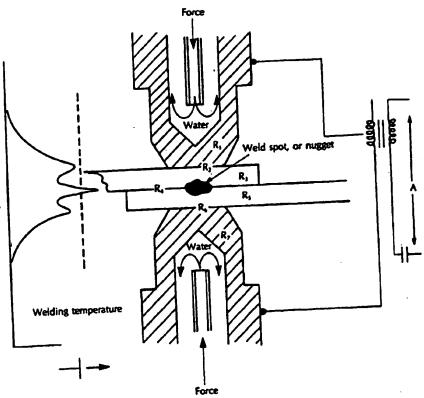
Schematic of the resistance (spot) welding (RSW) process showing it to be a circuit consisting of a series of resistors (R_1 through R_2), with heating intended to be greatest at the point(s) of contact of faying surface(s) between workpieces to create a weld nugget. (From *Joining of Advanced Materials* by R. W. Messler, Jr., published in 1993 by and used with permission from Butterworth-Heinemann, Woburn, MA.)
